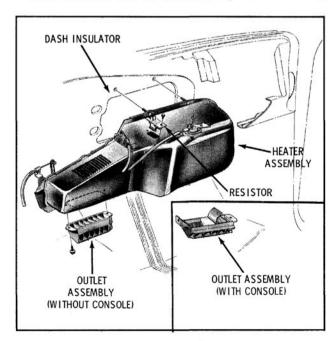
Heater Assembly (30-31 & 32 Series)
